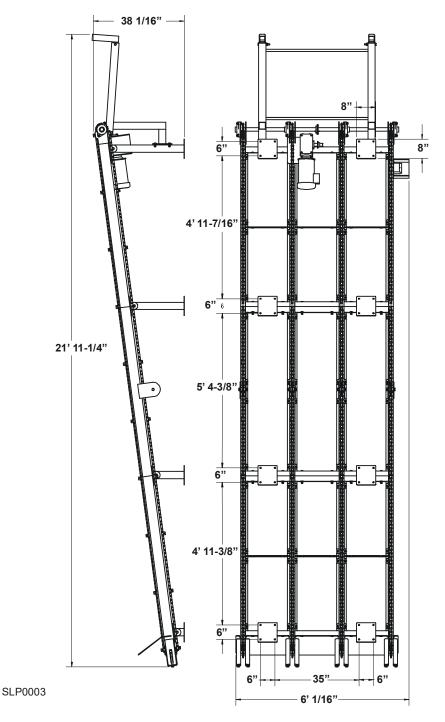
CROSS TRANSFER DECK DIMENSIONS (SLPCTD5.4)
